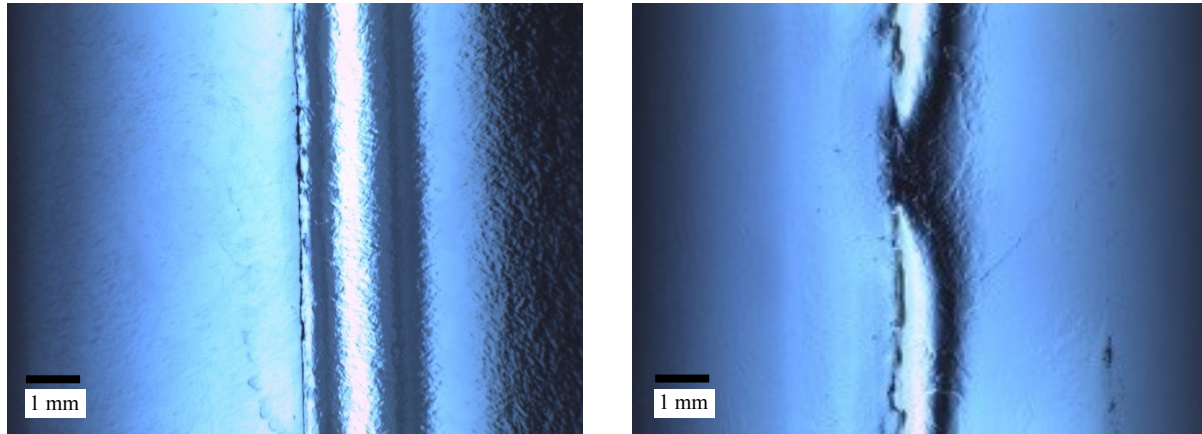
Image of the inner surface of areas of the equator weld of cells 1 (left) and 4 (right) in cavity 5C75-002 showing a sharp line between the weld and the surrounding Nb and a non-uniform weld, respectively.
